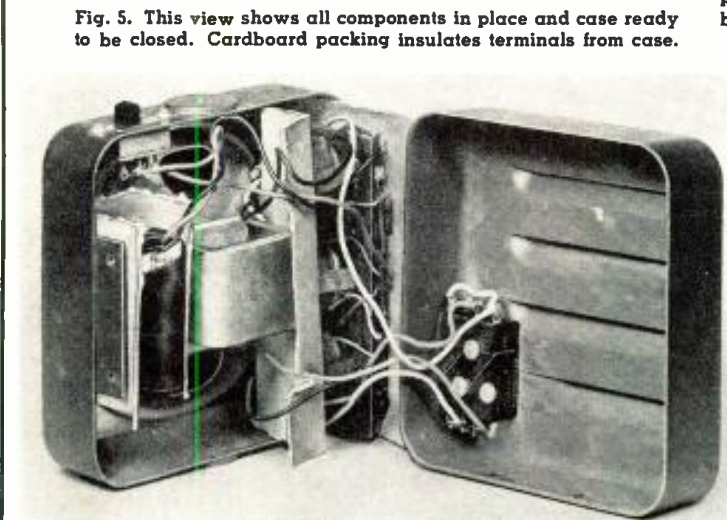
This view shows all components in place and case ready to be closed. Cardboard packing insulates terminals from case.
